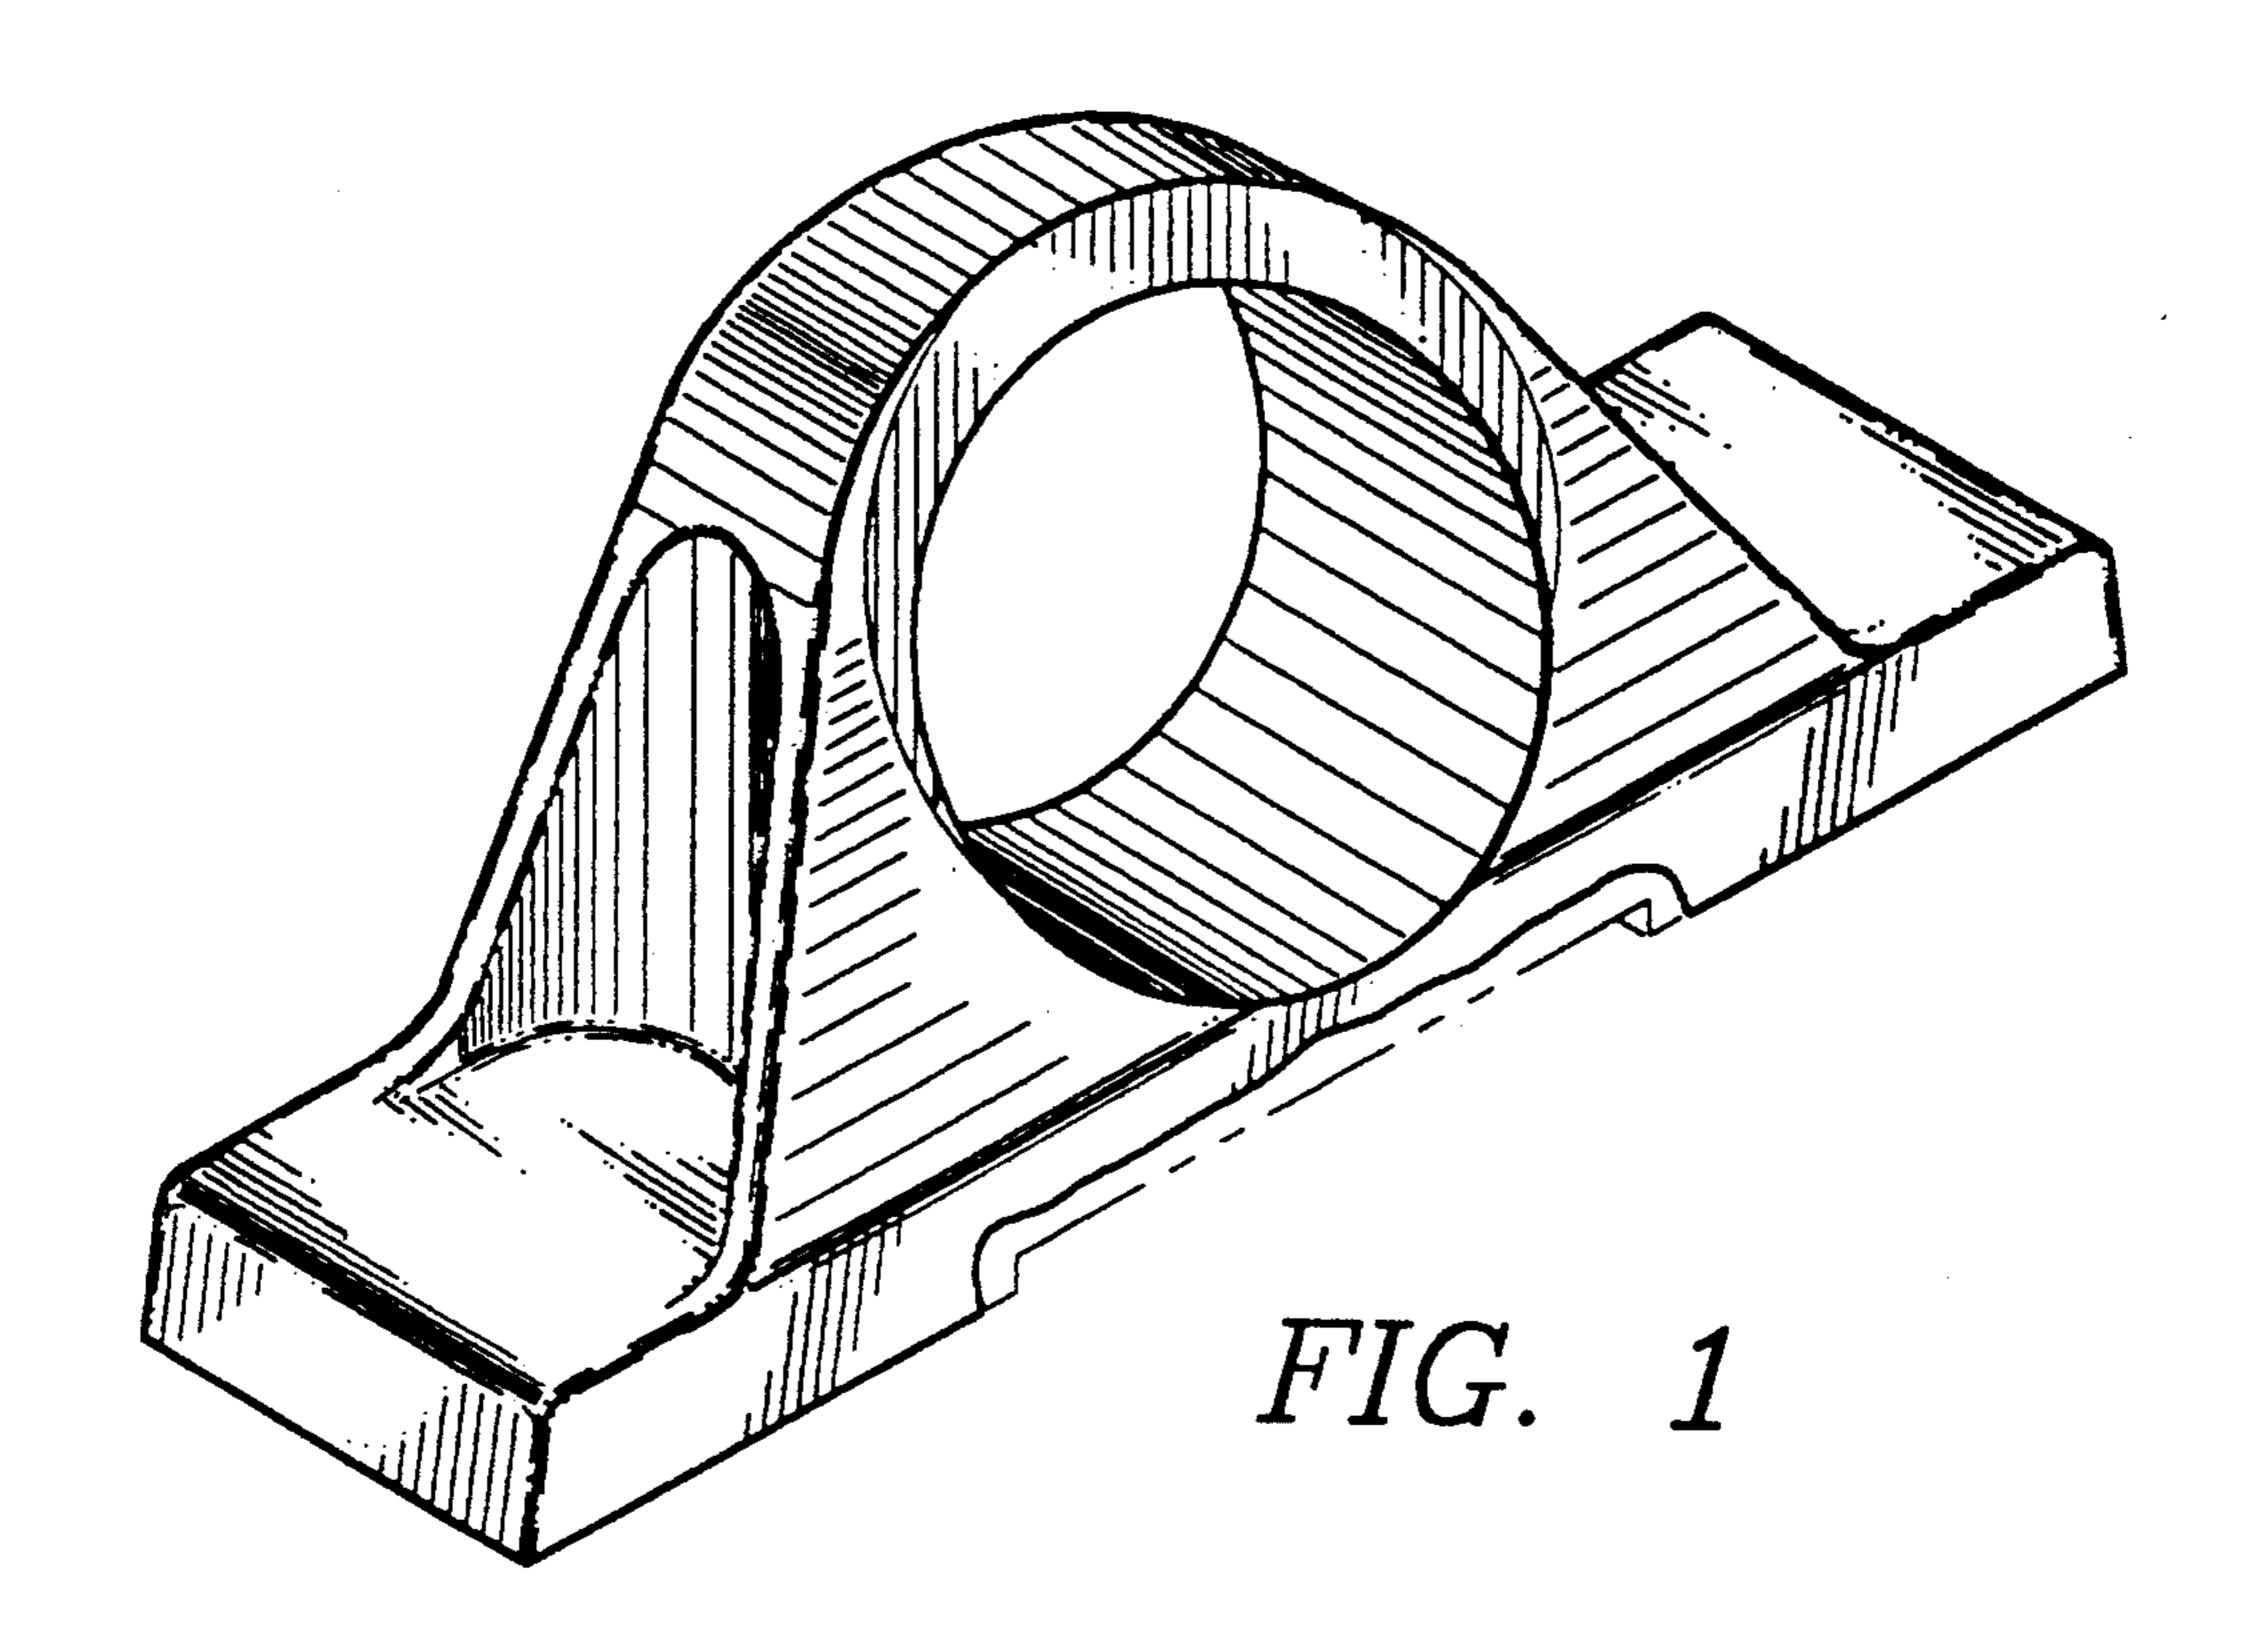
is an isometric view of the left side, top and front of a pillow block bearing housing showing my design; FIG. 2 is a front view of my pillow block bearing housing design;
